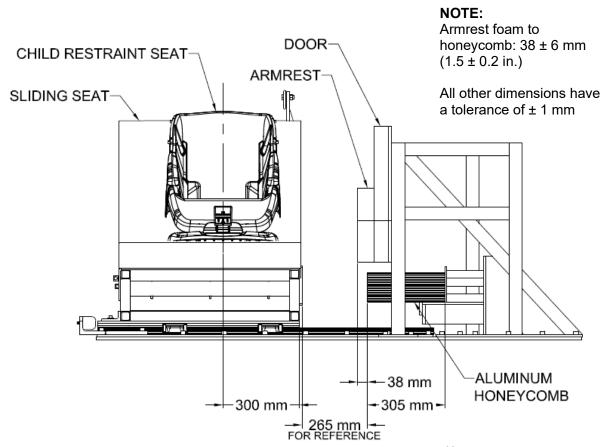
SISA FRONTAL VIEW<sup>16</sup>
